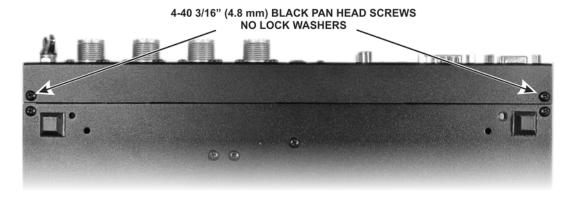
Installing Screws in Rear Panel Bottom Lip.
